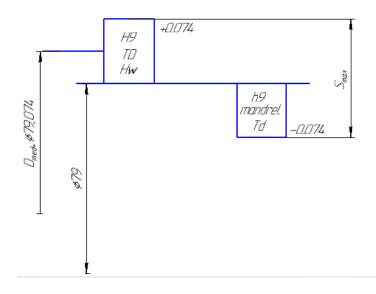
Tolerance zones of the mandrel (Td) and the workpiece (TD)
